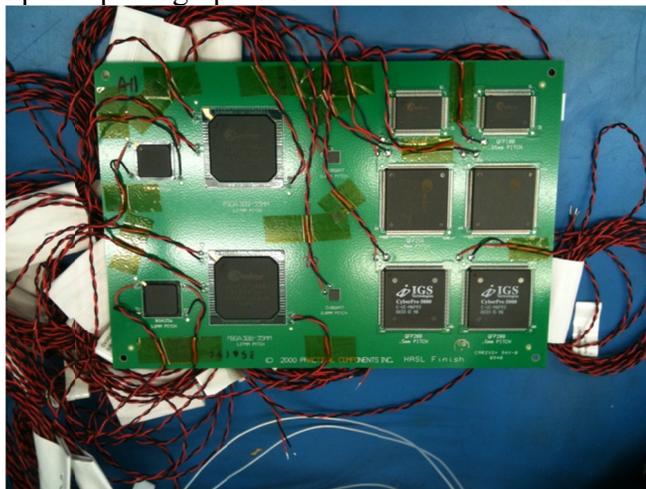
Optical photograph of top view of the test board (5.5" x 8")
